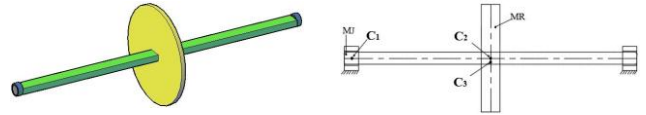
Rotor-Shaft system model by oil-film bearings.
